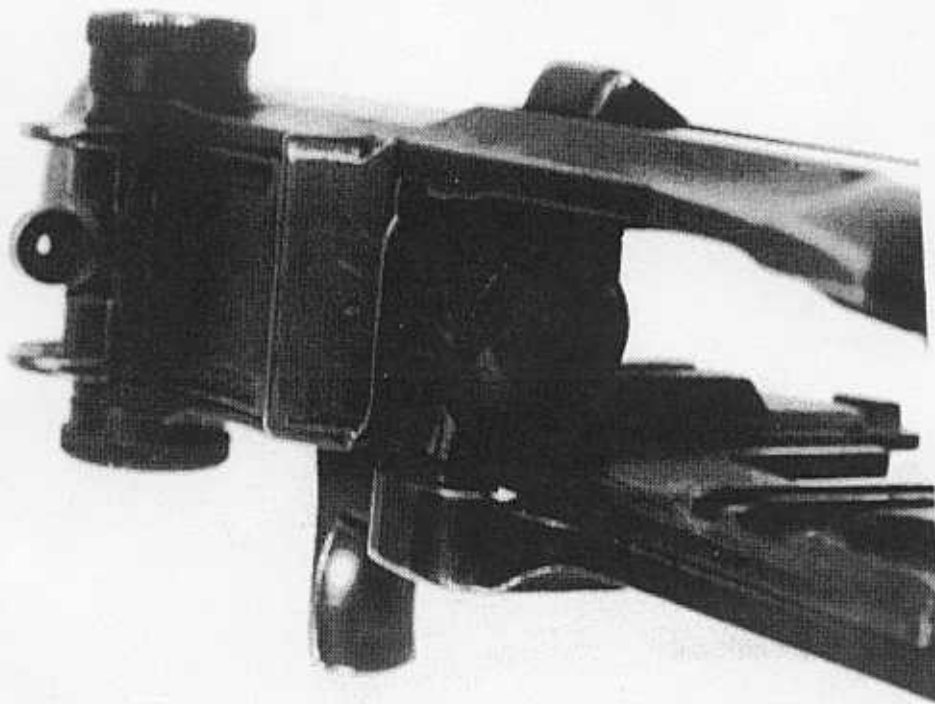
MODIFICATION OF M1 RIFLE, BOLT ASSEMBLY WELDING
